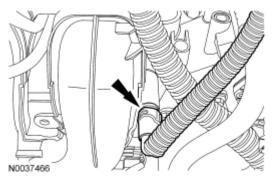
Locating Evaporative Emissions (EVAP) Tube From Intake Manifold Courtesy of FORD MOTOR CO.
